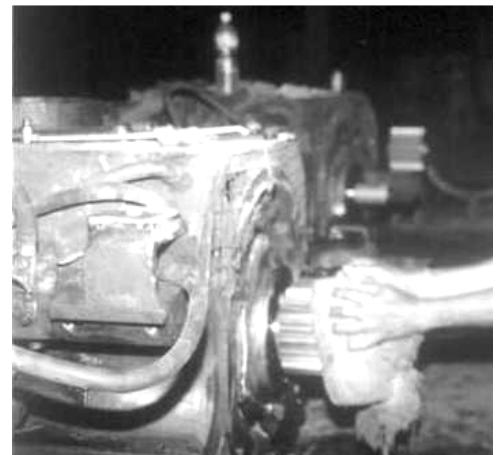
SHRINK FITTING OF PINION ON SHAFT
